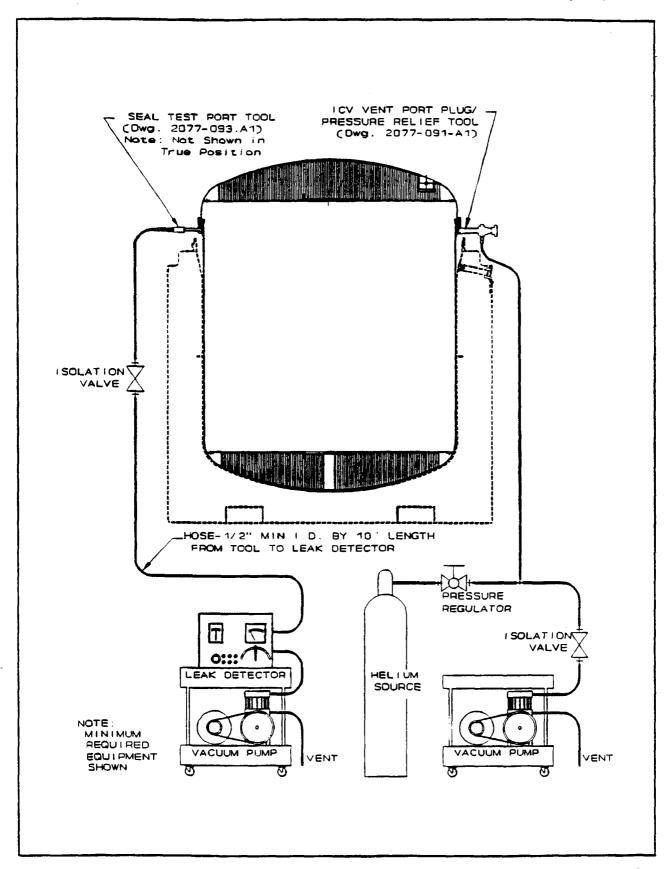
O-Ring Seal Leak Test Setup Support Arrangement for Assembled ICV
